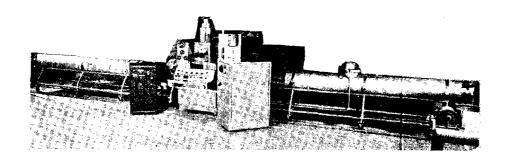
ELECTRON BEAM WELDER INSTALLATION AT SRL
